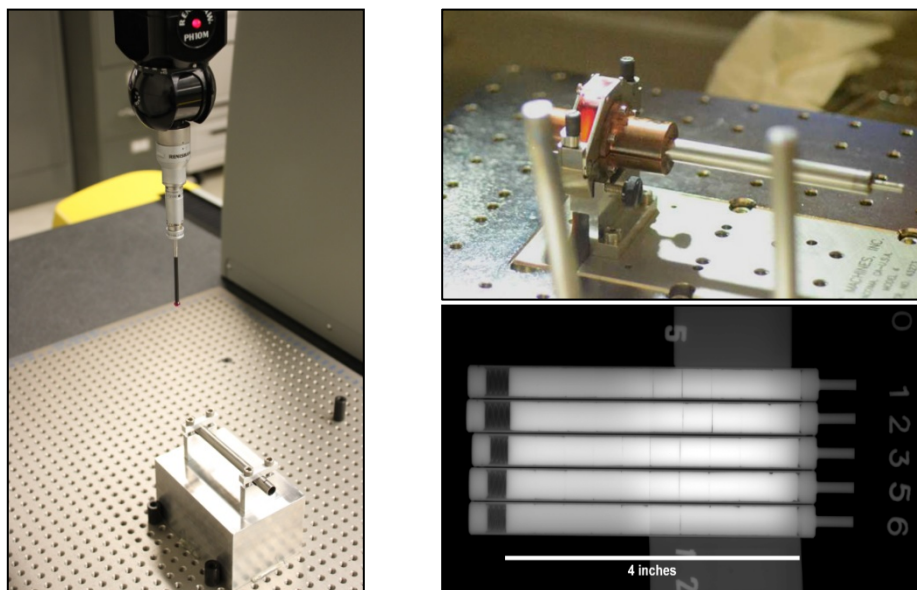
Preparation of ATF-1 capsules (a) AMI orbital welder; (b) Coordinate-Measuring Machine (top); and (c) digital radiography of welded capsule assemblies (bottom).
